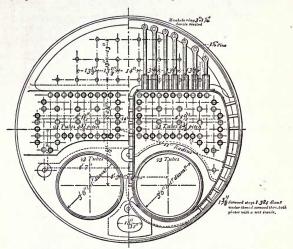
Half-end view and cross section of the boiler shown in Fig. 127.
